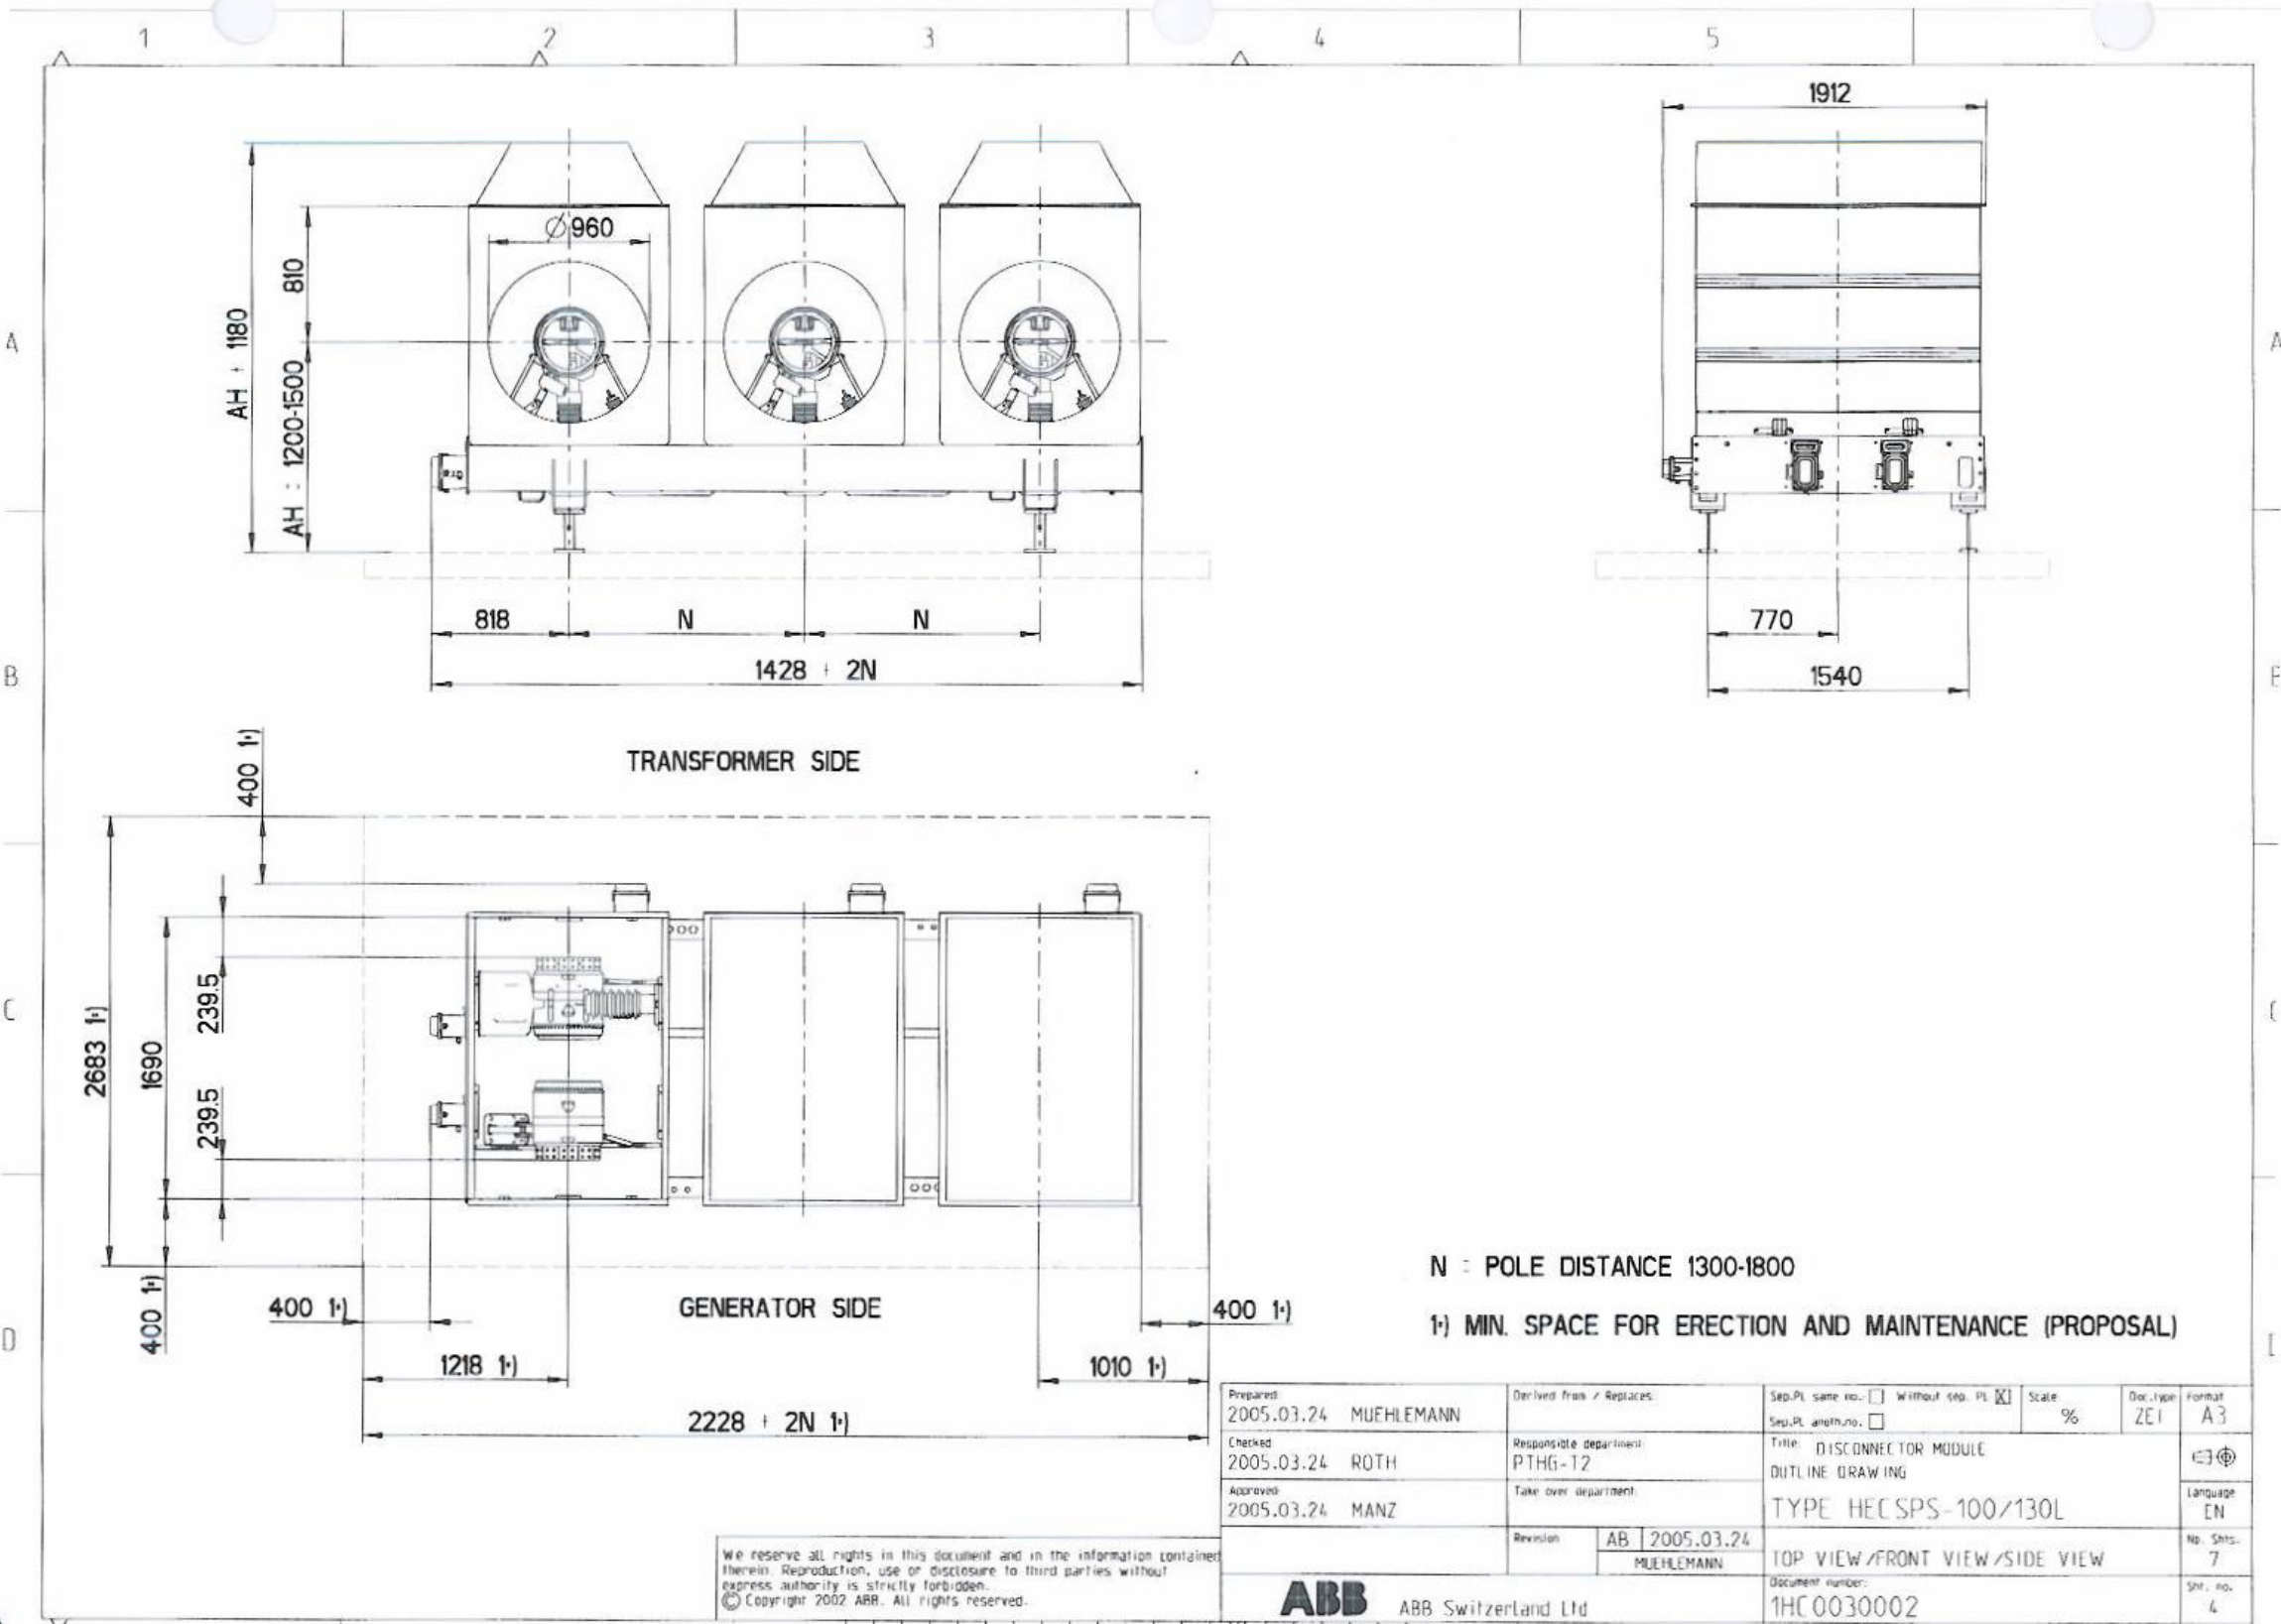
Toshiba Typical Supply ABB Type HECPS-100/130L, Drawing 1HC0030002, Sheet 4 of 7
